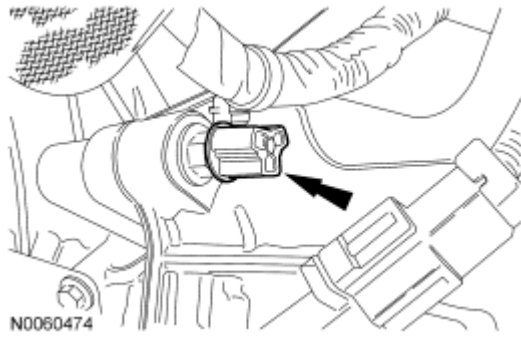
Locating Wiring Harness Retainer From Stud Bolt
